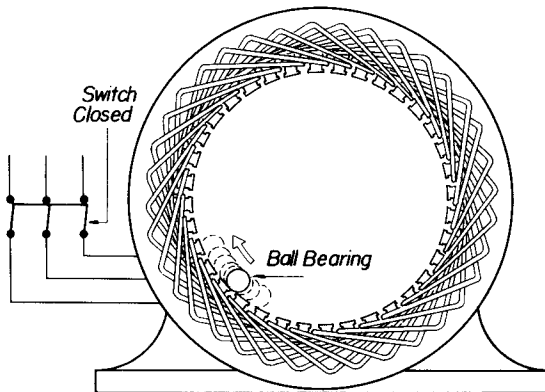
The ball bearing should rotate around the core of the stator if internal connections are correct.
